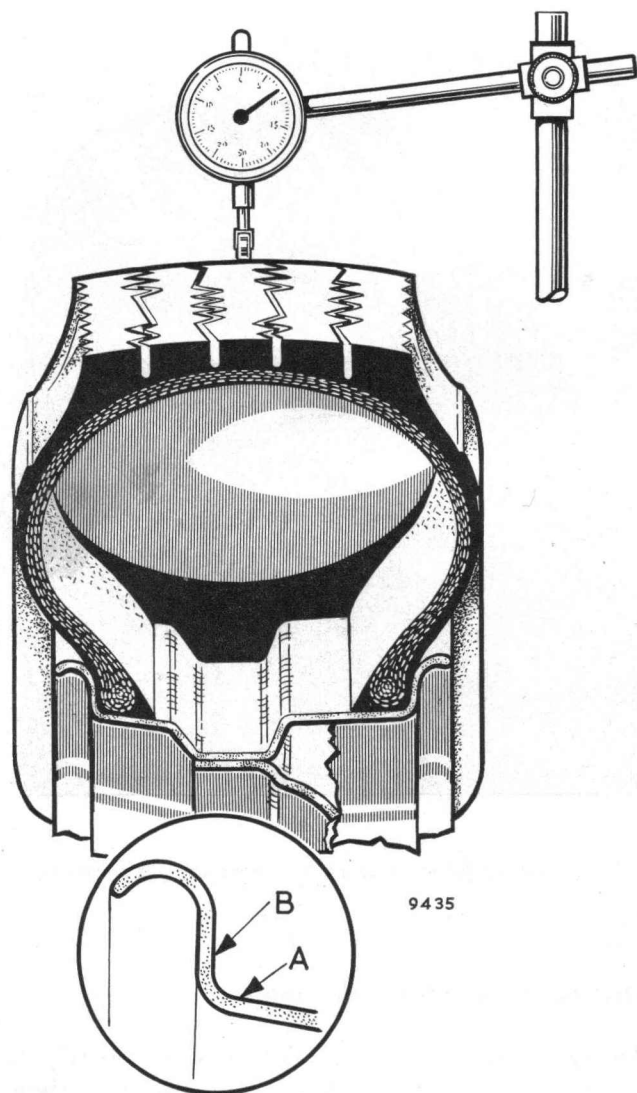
Checking wheel and tyre run-out. "A" and "B" indicate the points to be checked for wheel "lift" and "wobble".
